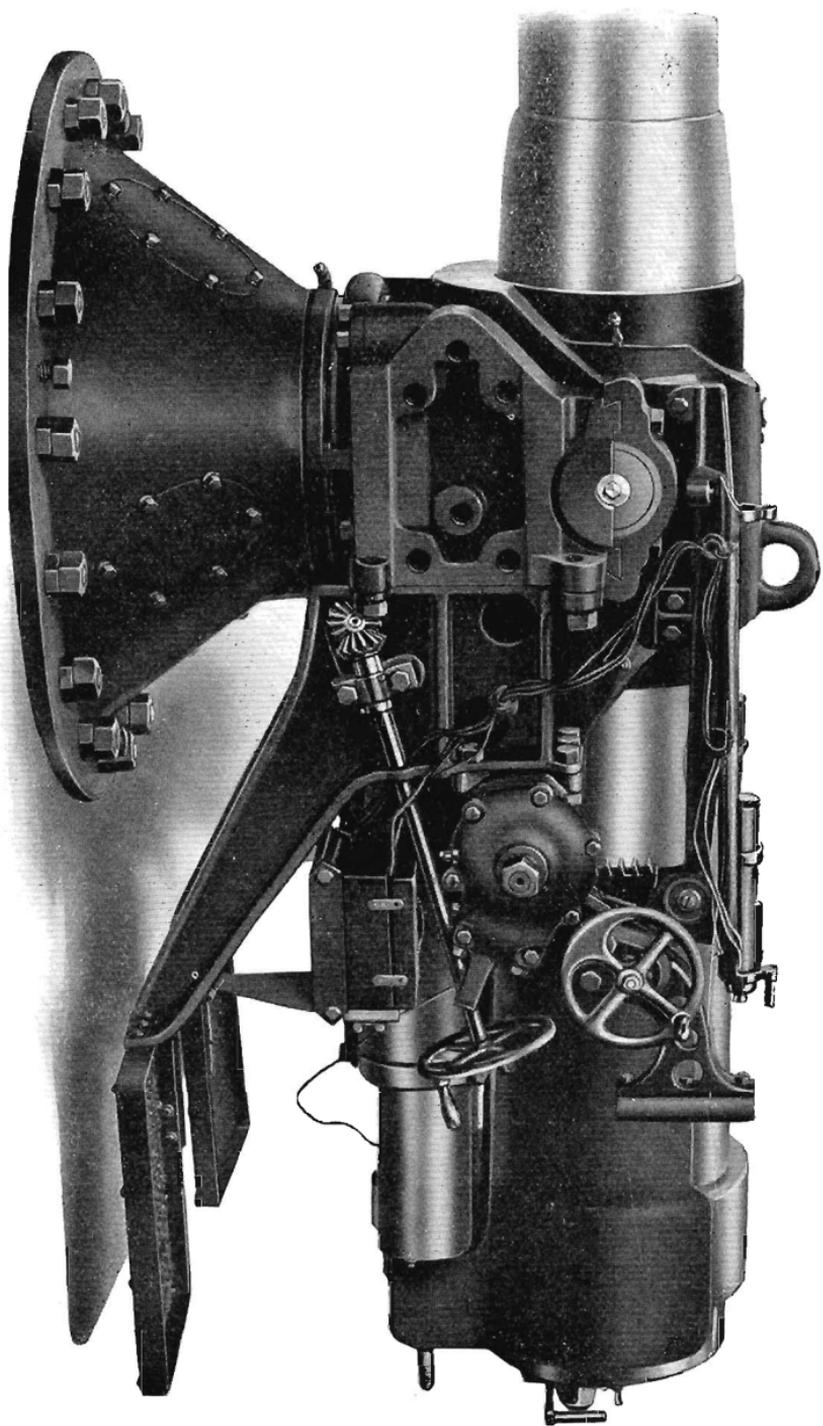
Pedestal Mount for 6-inch Gun, Shield Removed.
